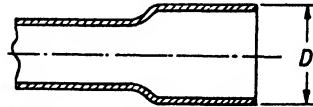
BULGING TEST FOR MILD STEEL TUBING
